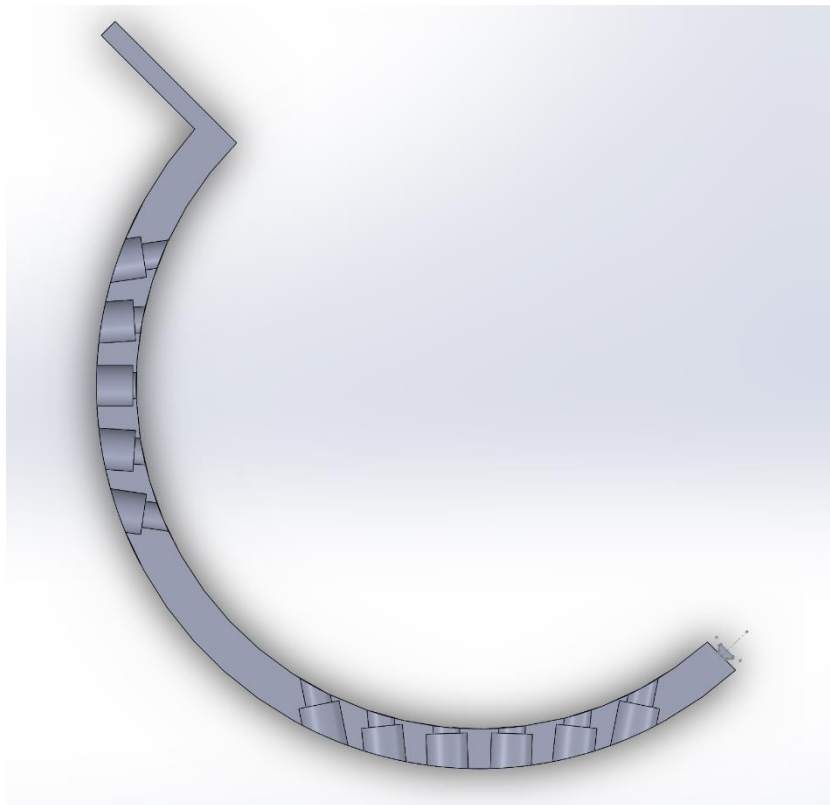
Top Sectional View of Top Layer of Clamp, New Design
